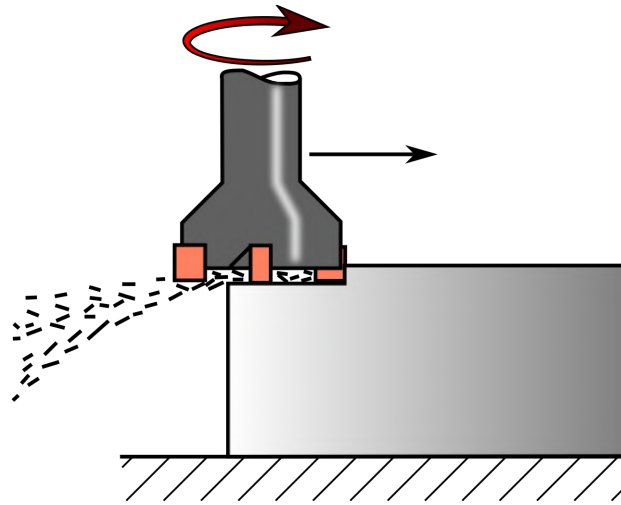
Schematic of Face milling process (source:Wikipedia)
